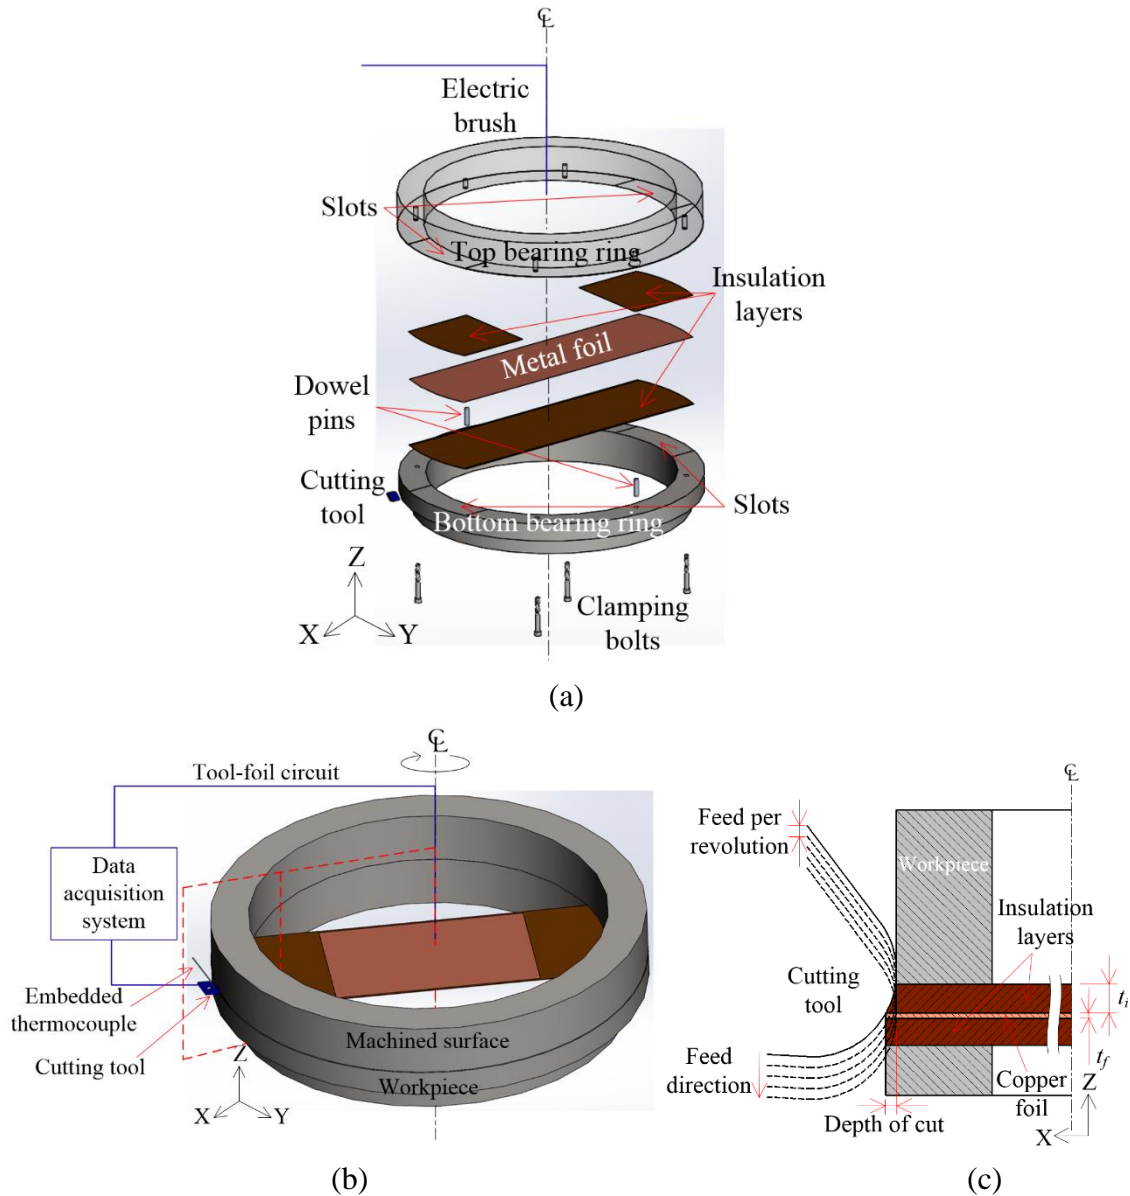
The tool-foil thermocouple method: (a) exploded view, (b) overview of the setup for tool-foil voltage measurement, and (c) close-up cross-section view of the cutting tool with metal foil and insulation layers during hard turning.
